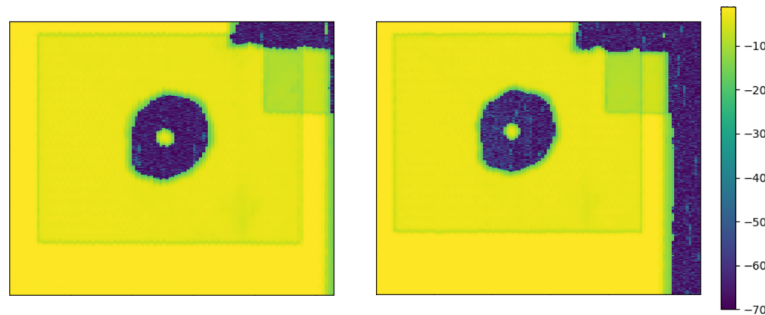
C-scan of specimen AMP-600N-10sec. Left: before welding. Right: after welding.
